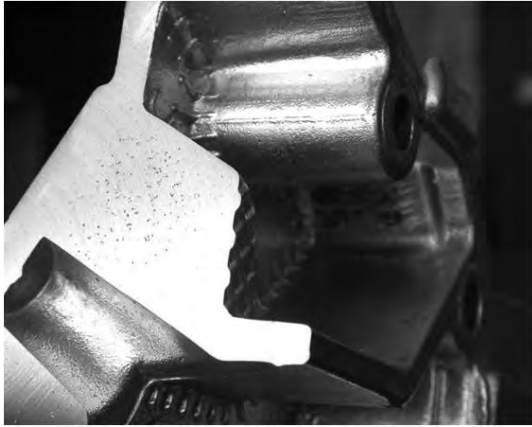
Cut through a high-mess section of a casting part. You can see shrinkage holes which are connected with the surface and draws.
